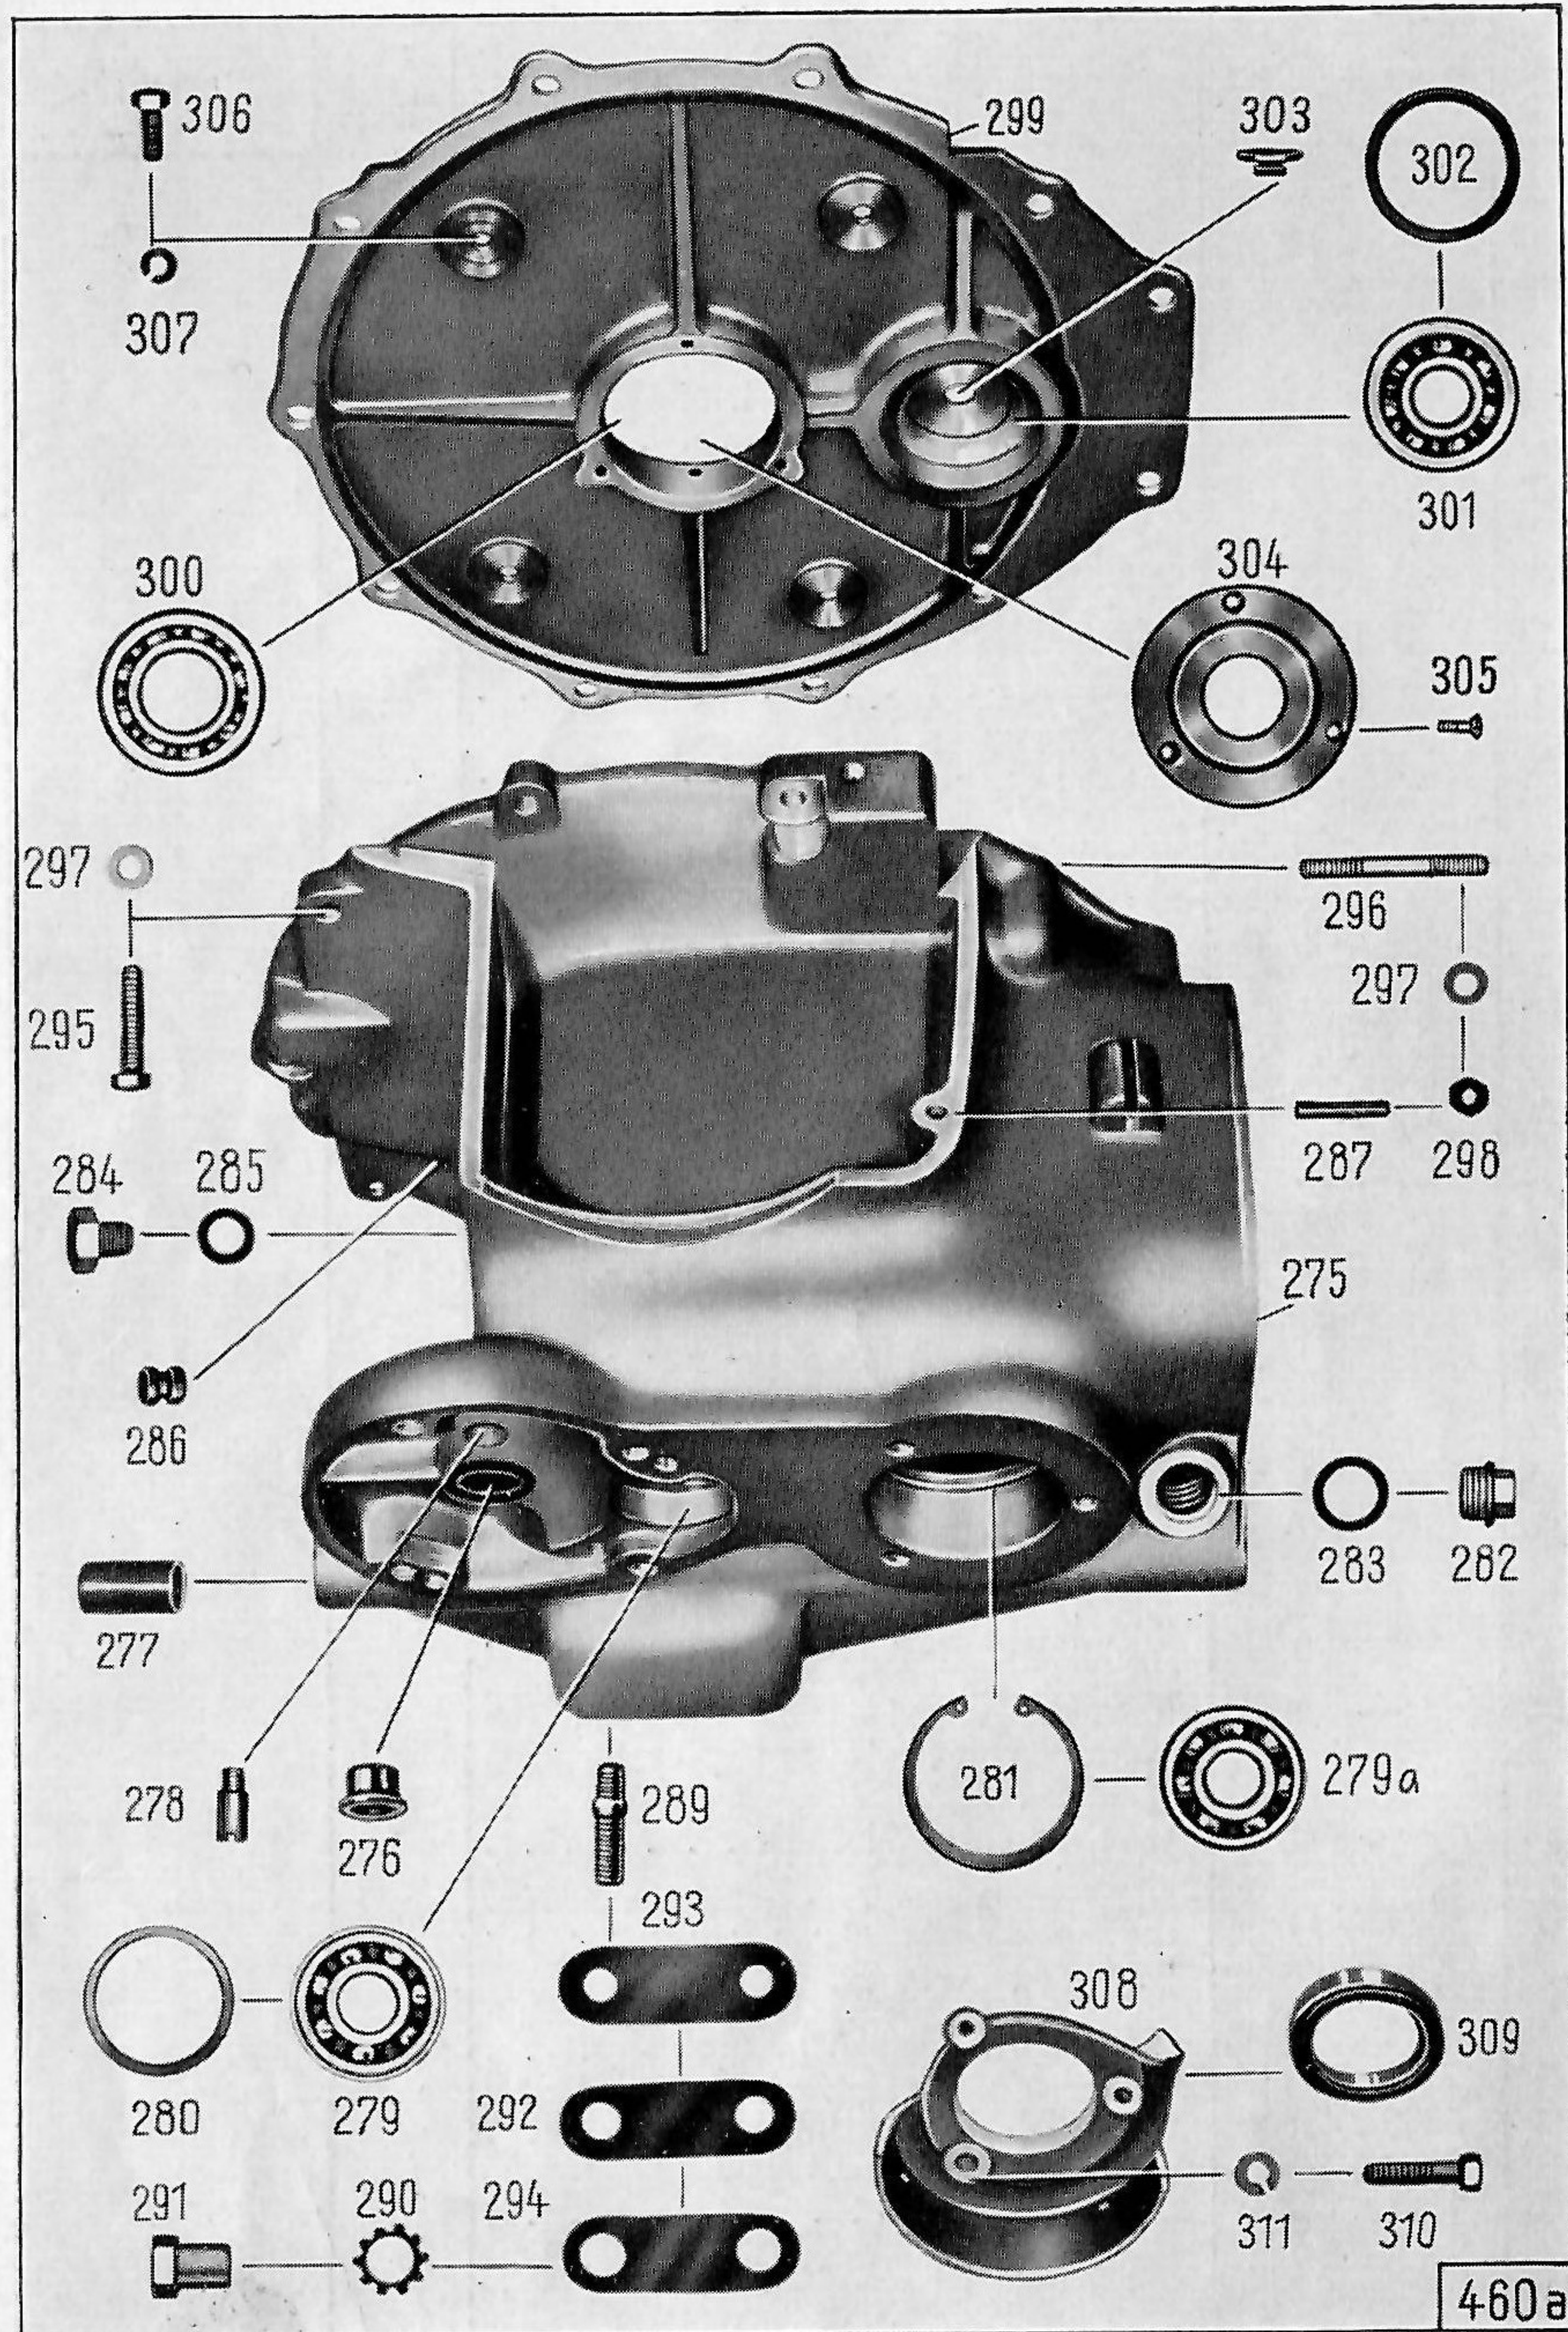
, Group G: a) Change-Speed Gear Unit, b) Gear-Set Case
